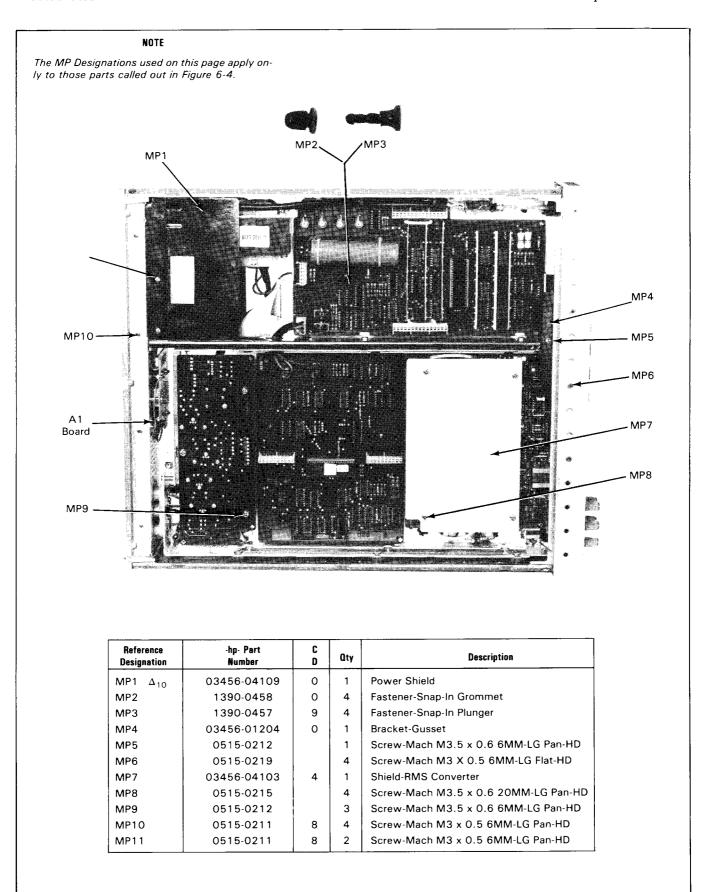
Bottom View of Chassis with PC Boards Installed.
